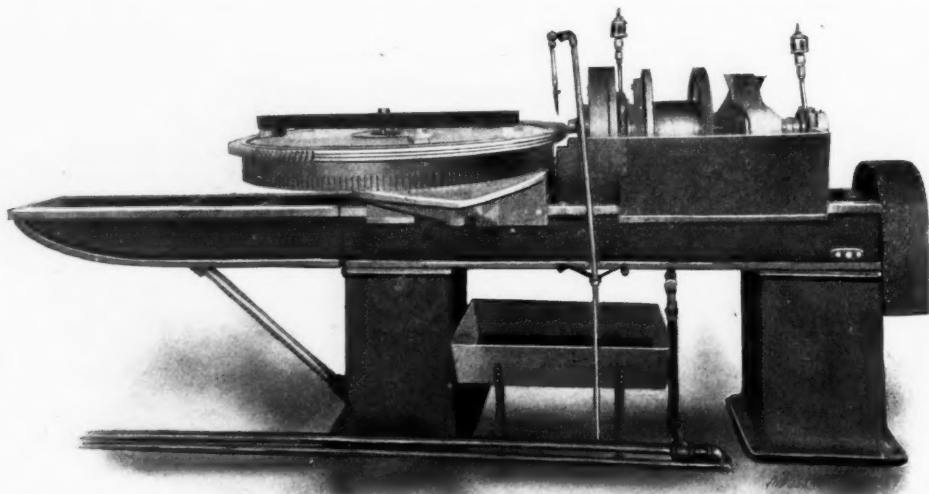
Earlier Type of Bucket Cutter at work on a Disk for a small Turbine.
